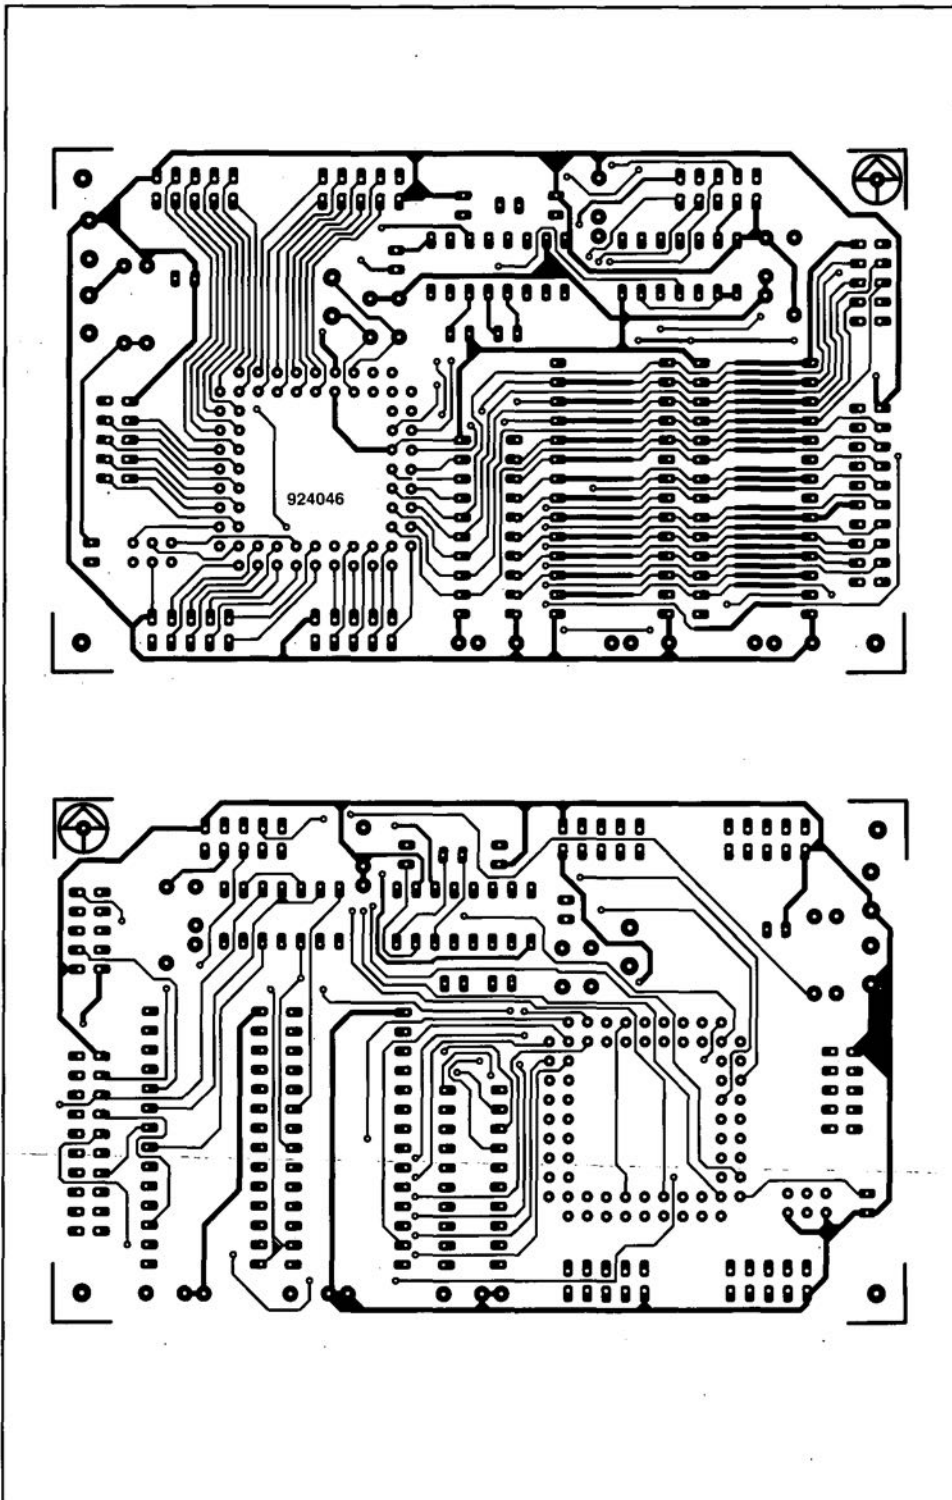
Track layouts of the double-sided through-plated printed circuit board.
